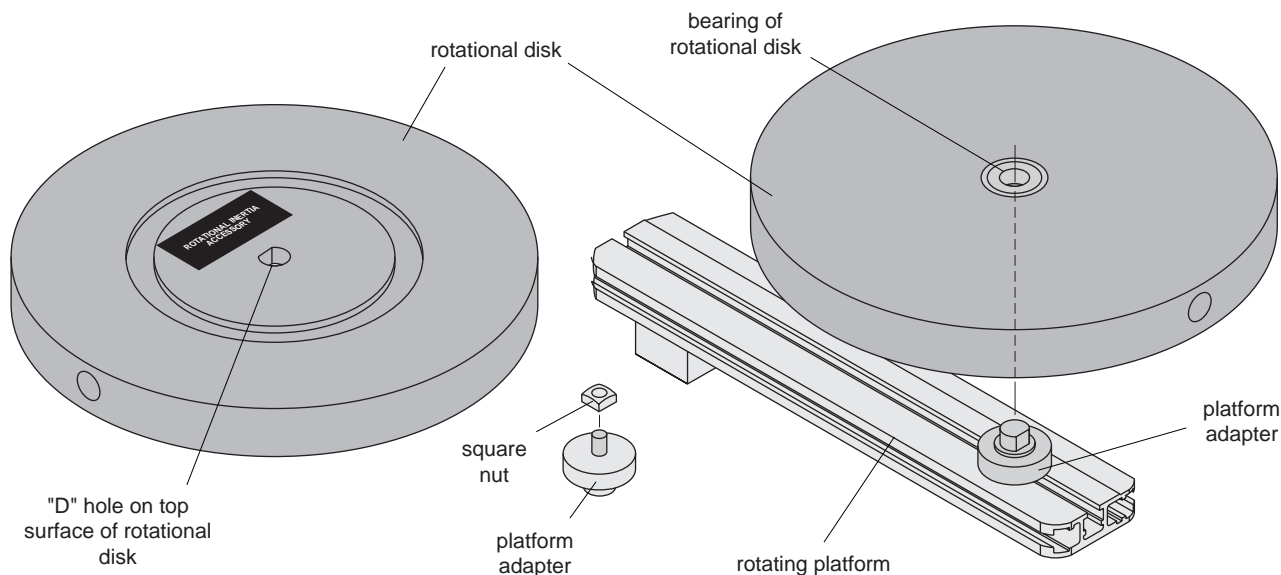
Rotational Inertia Accessory Including Platform Adapter Assembly
